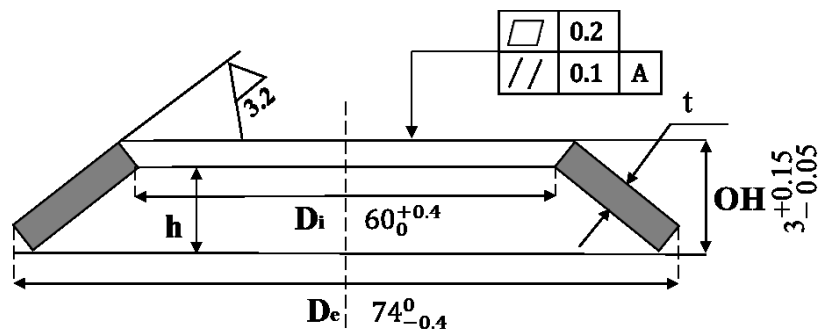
Geometrical parameters of the disc spring component (dimensions in mm).
